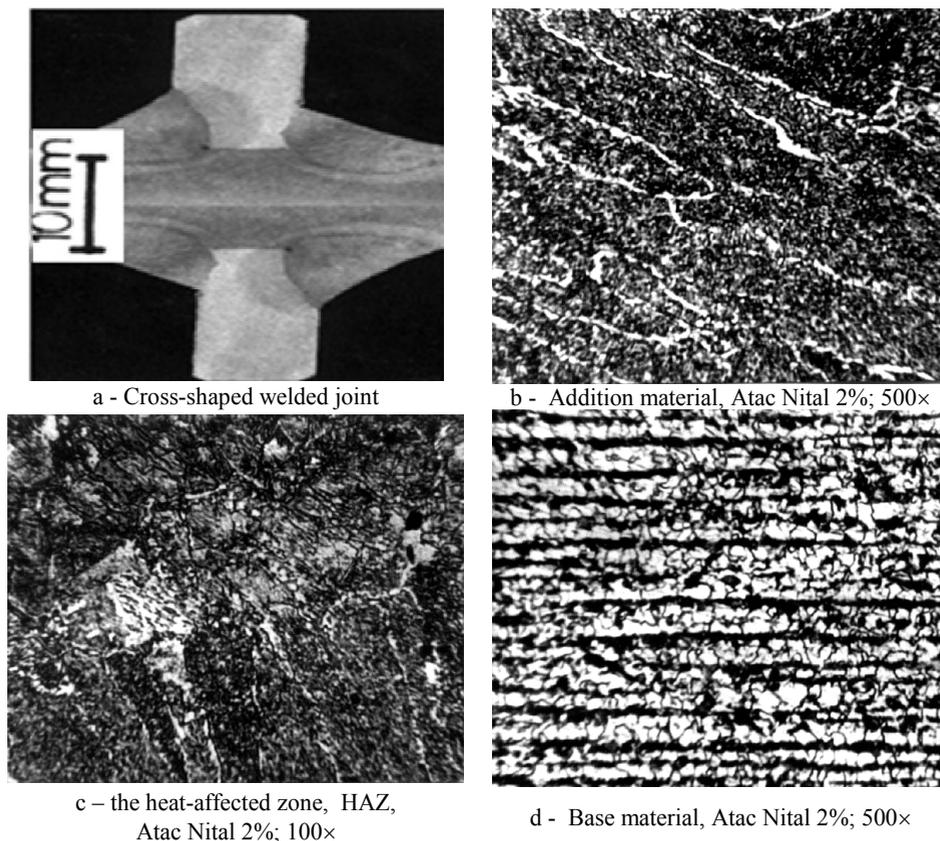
The metallographic structure of materials in the cross-shaped welded joint - sample 5.
